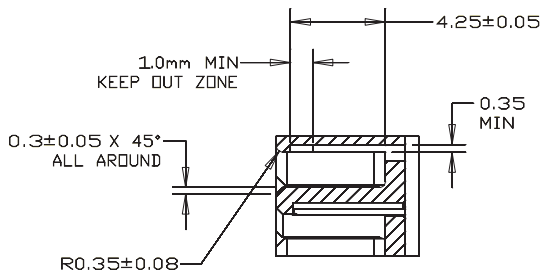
Slimline Device plug connector interface dimensions (Section C-C)
